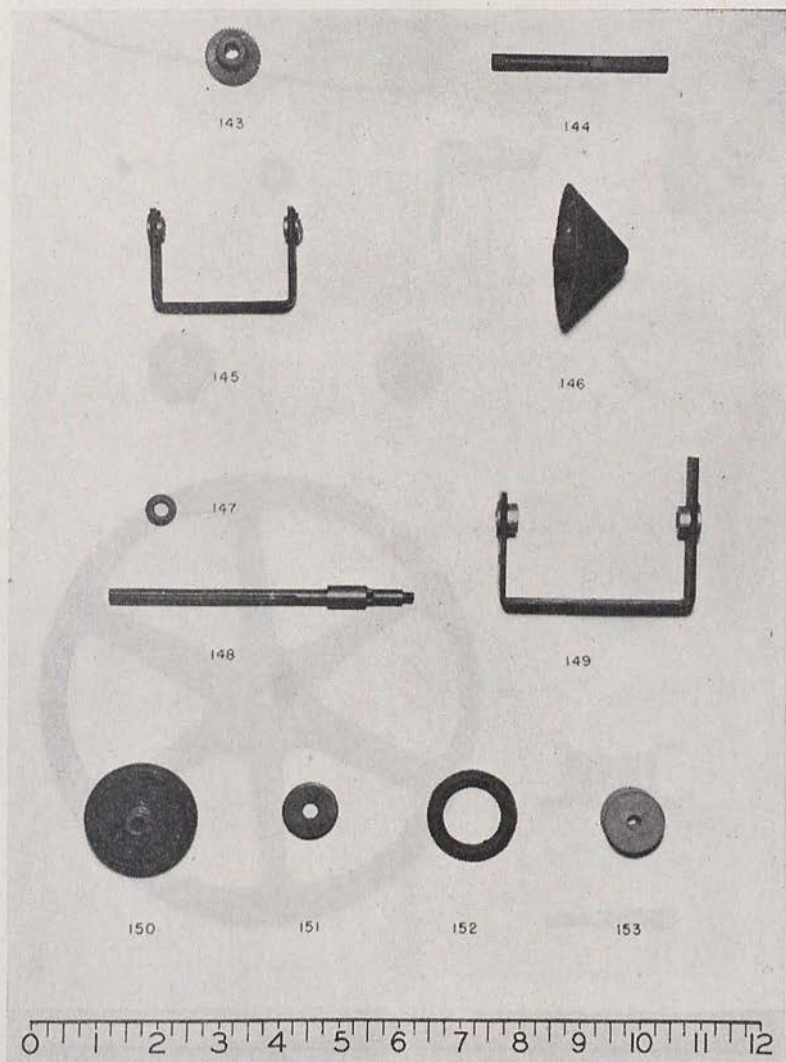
Keyer TG-34-A, replacable parts 143 to 153.
